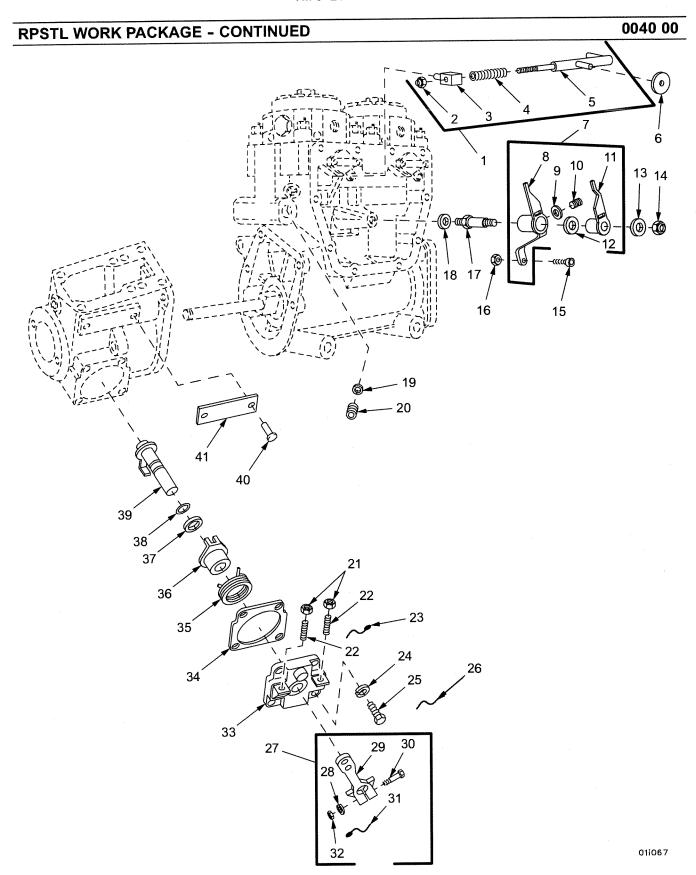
Yoke Assembly, Lever Assembly, Operating Lever Assembly and Associated Parts.
